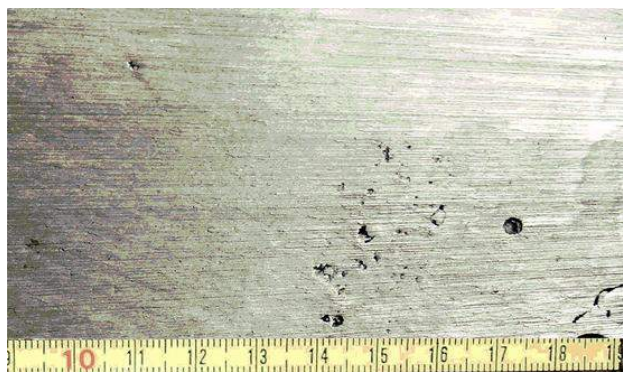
Gas holes and shrinkages on casting, zone near flange radius R80
